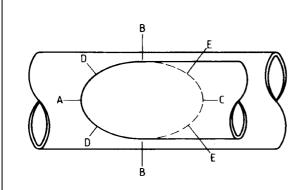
Plan view of typical oblique node joint showing positions of weld cross sections
